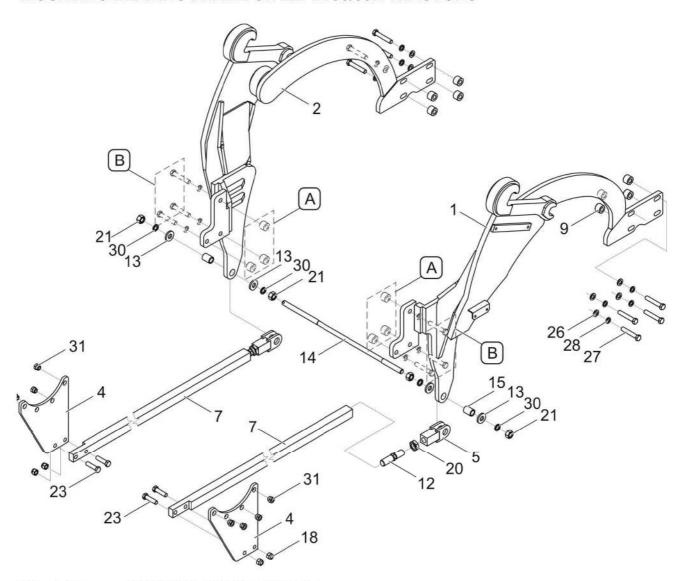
A Mounting bearing frame on Zefir 85/85K tractors
